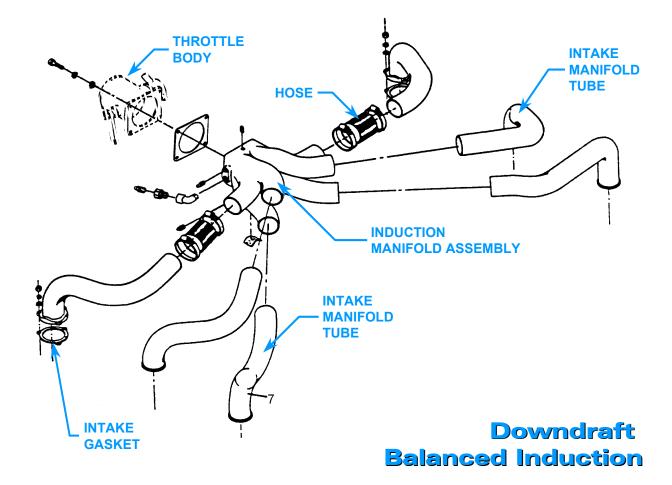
Exploded View of Top Mounted Downdraft Induction System.
